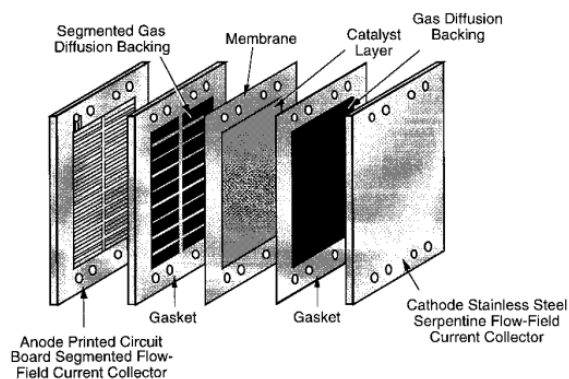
Schematic of the printed circuit board (PCB) segmented electrode [13]
